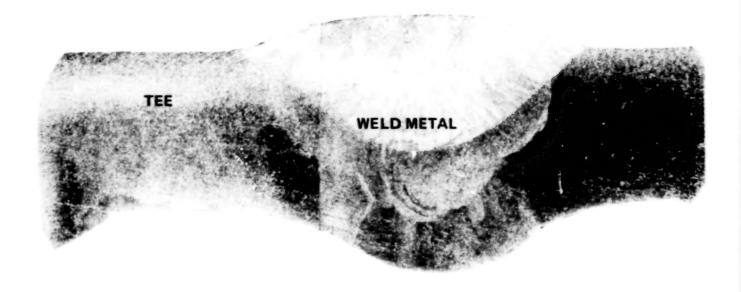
Photomacrograph of manifold pipe to tee weldment.
